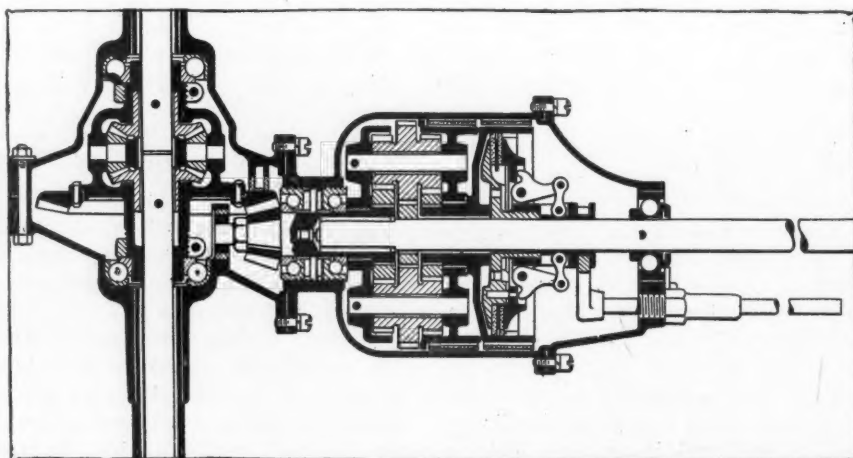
MUNCIE GEAR WORKS REAR AXLE
